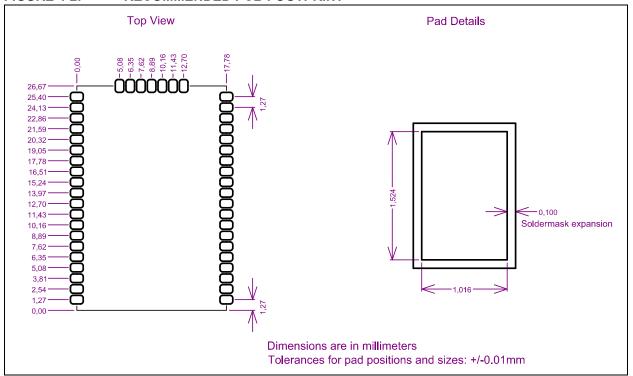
RECOMMENDED PCB FOOTPRINT
